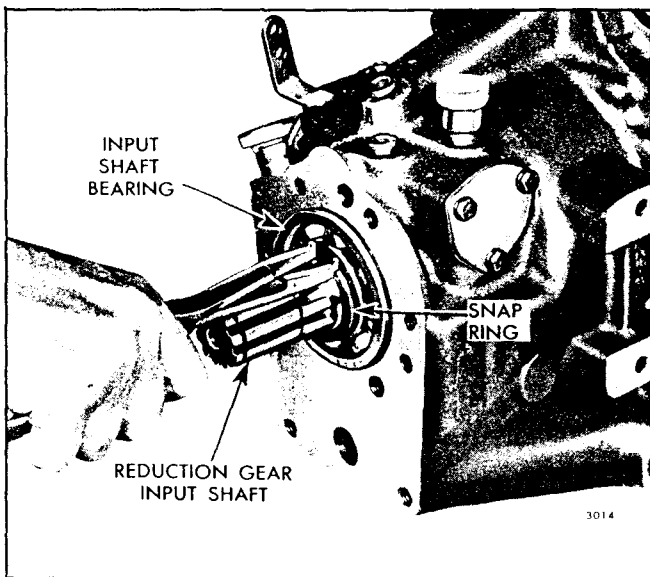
Removing or Installing Reduction Gear Input Shaft Bearing Snap Ring (2.5:1 and 3:1 Ratios)
